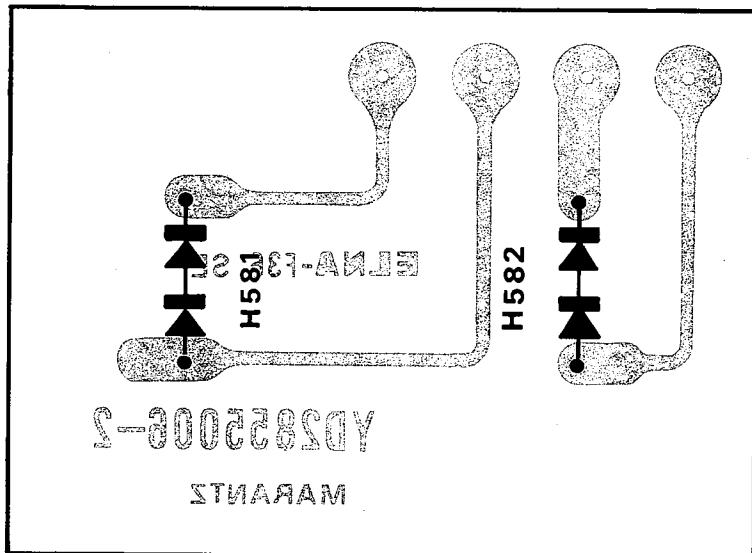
Temperature Compensation Unit Assembly P580 Component Locations
